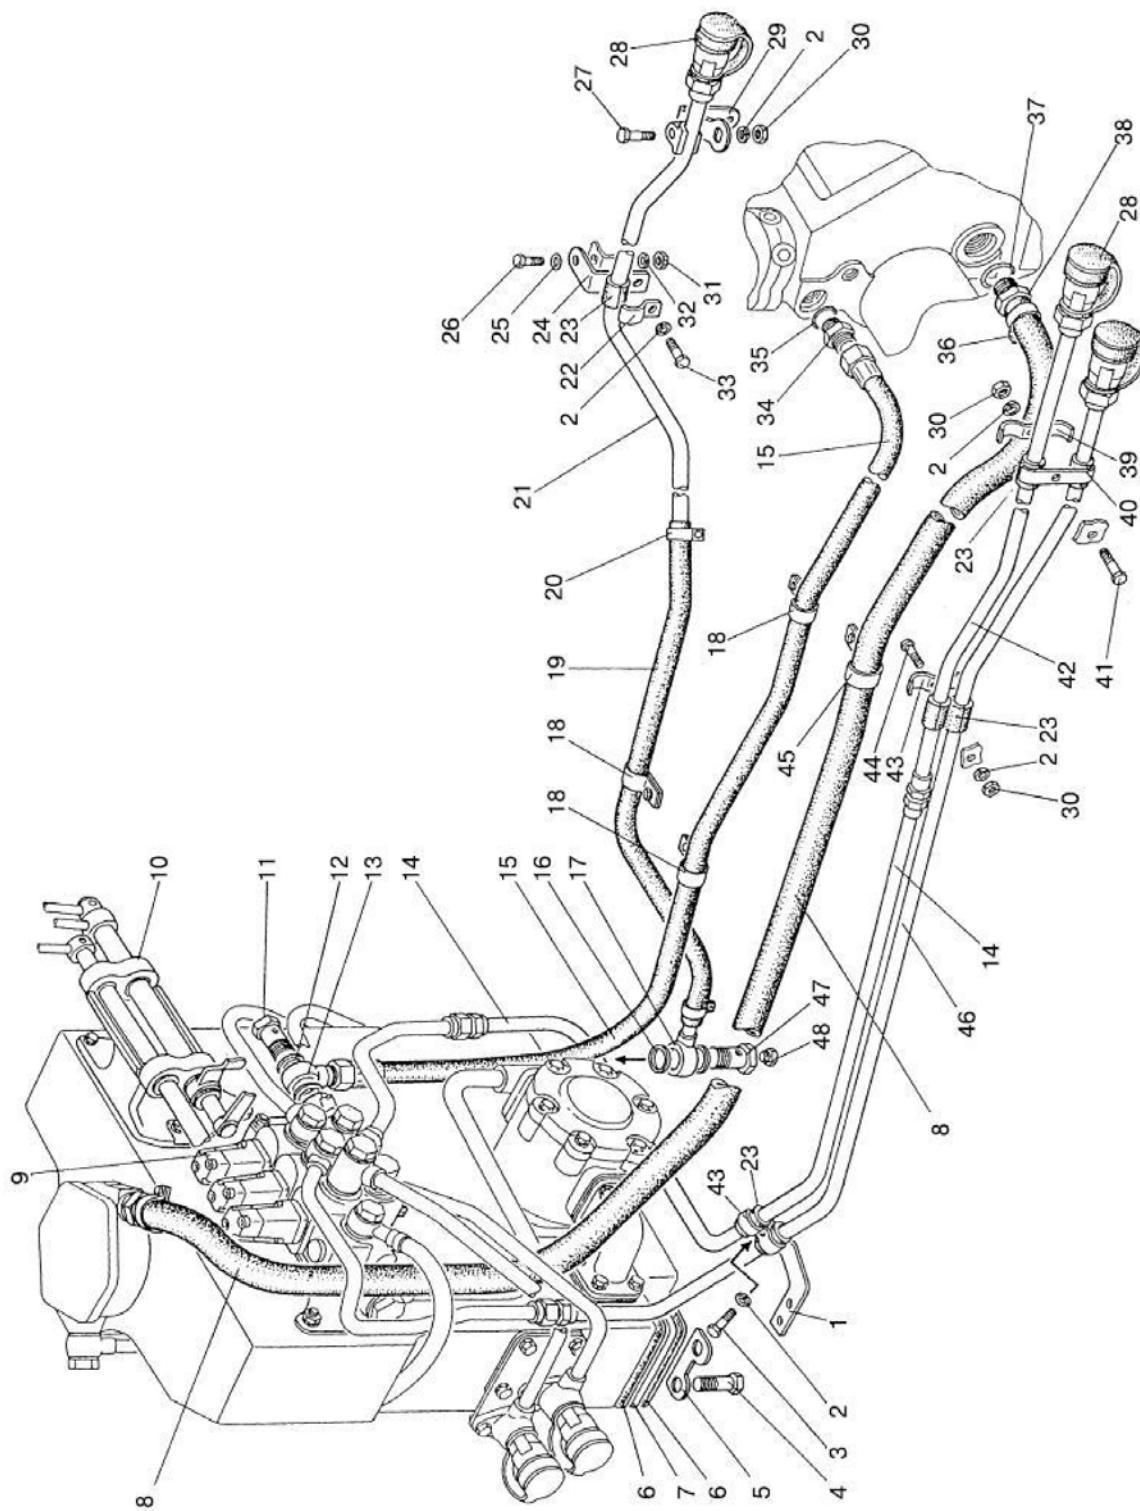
Hydraulic units and fittings (if the tractor is equipped with a hydraulic host)
